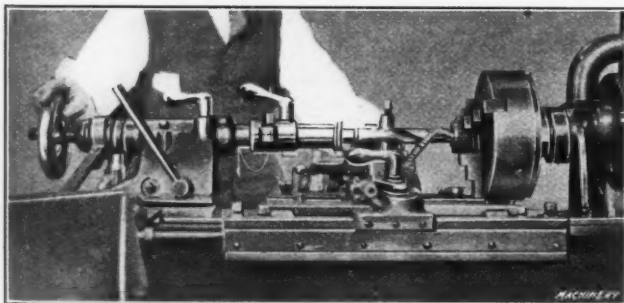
"Satco" Drill Holder performing a Drilling Operation
